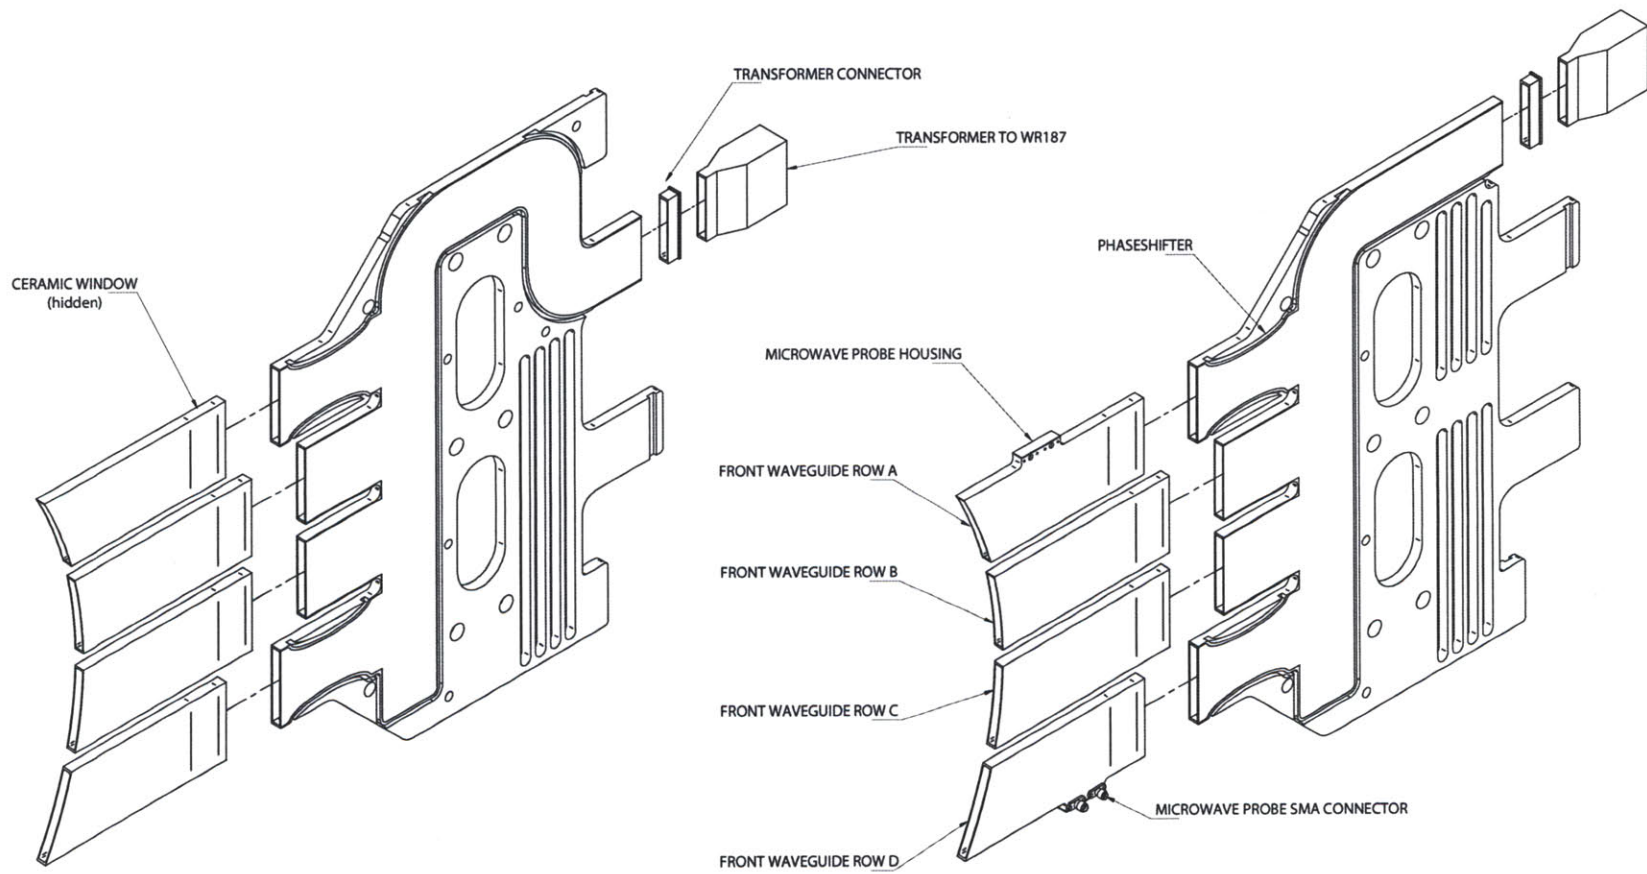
CAD explosion of the S-bend feed and straight feed four-way-splitter assemblies.
